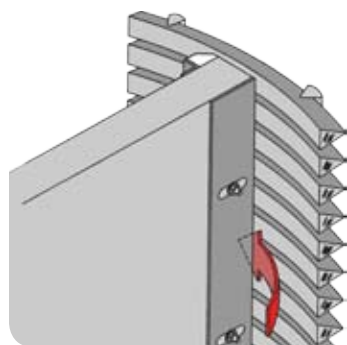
Wedge Wire Straining Element Cross-Section with Adjustable Accelerator Plate
